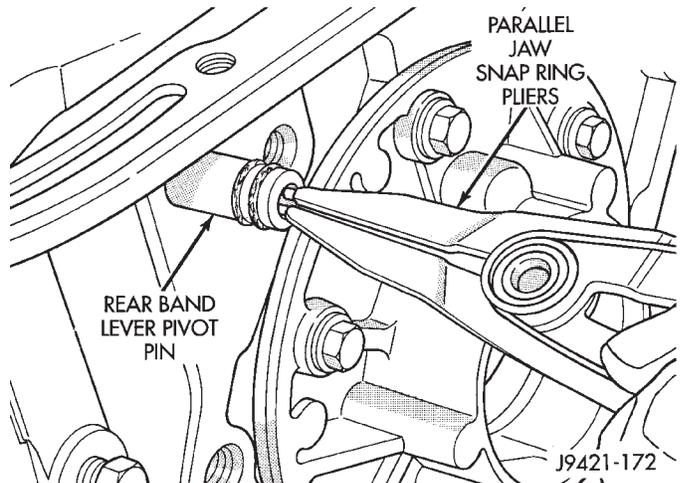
Removing Rear Band Lever Pivot Pin (30RH)
